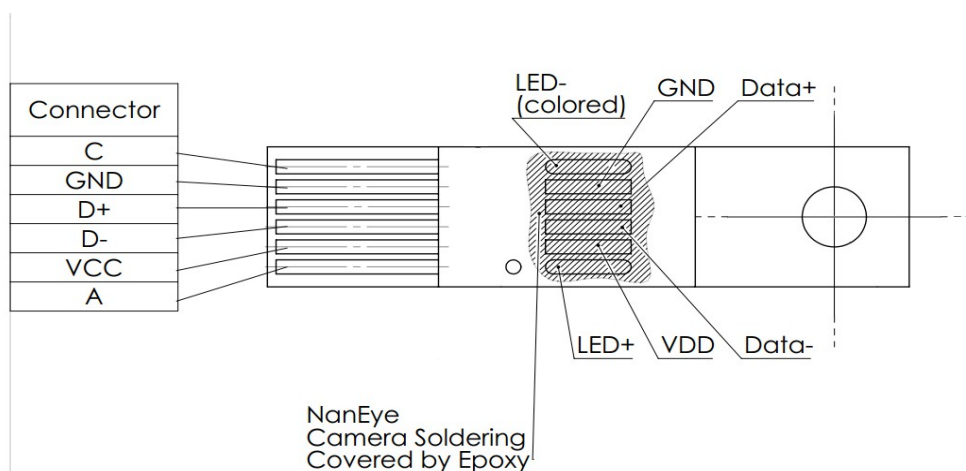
Identification of cable pin out for 6 cables (FLEX PCB connector)
